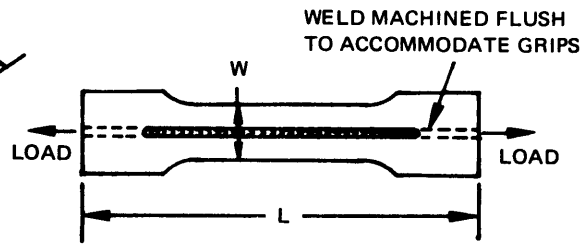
Typical Longitudinal Butt-Weld Specimen (Gurney 1968)
